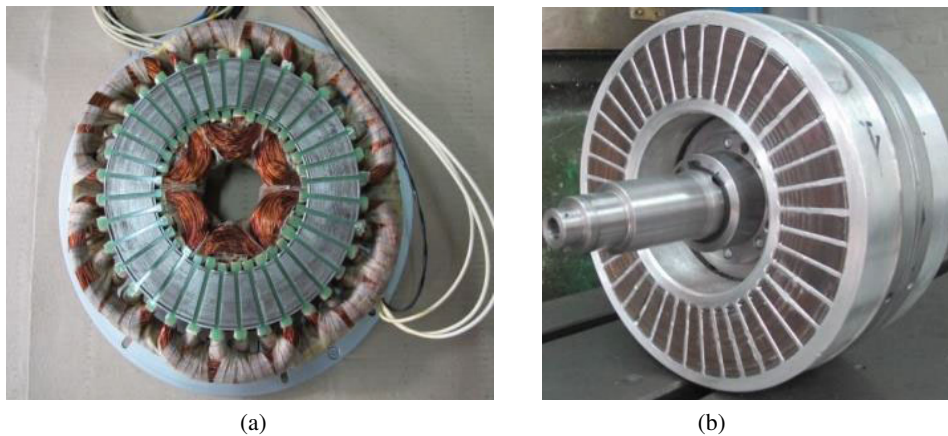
Model of the motor: (a) stator with winding (b) rotor fitted with bearing into the shaft
